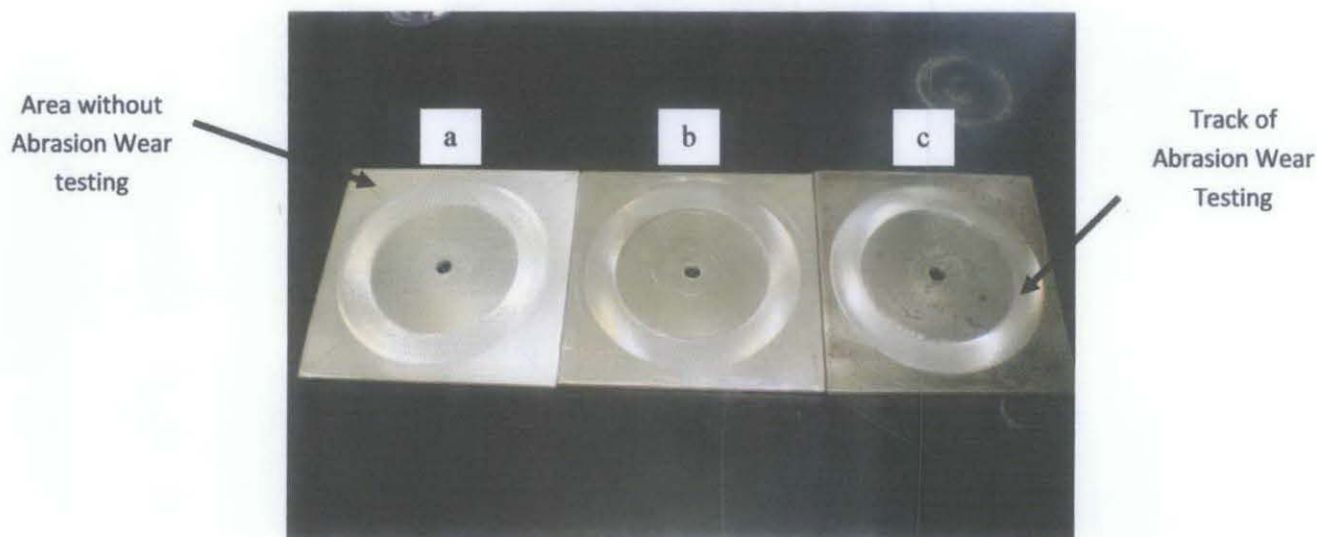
The Sample after Abrasion Wear Testing - a)Aluminum 6063, b) Stainless Steel 316, c) Mild Steel
